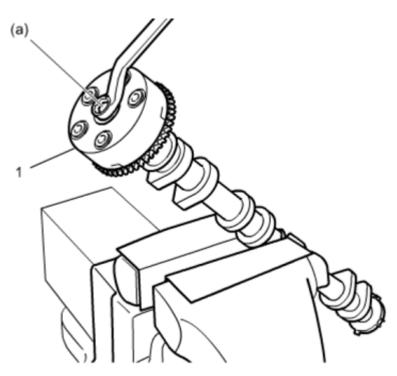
Installing CMP Actuator To Intake Camshaft Courtesy of SUZUKI OF AMERICA CORP.
